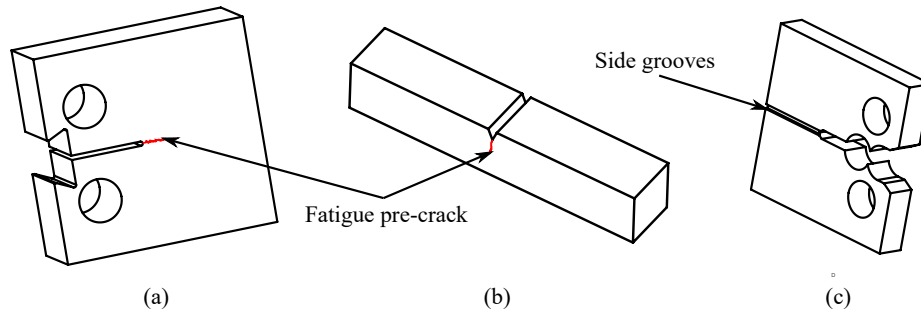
Some examples of precracked samples used to quantify fracture toughness: (a) Thick Compact Tension - C(T) specimen without side grooves, (b) Single Edge Notched Bending - SEN(B) specimen, (c) Thin C(T) specimen with side grooves
